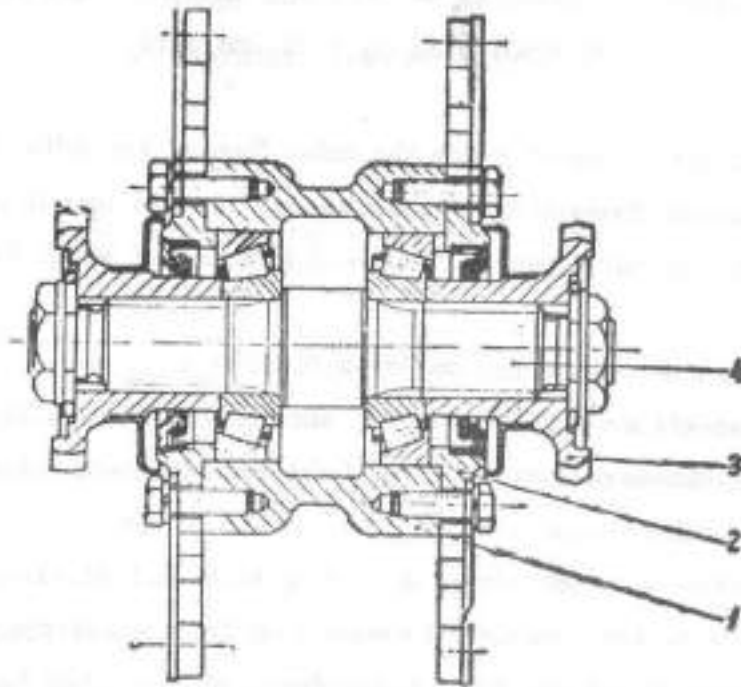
PROPELLER SHAFT MIDDLE BEARING
